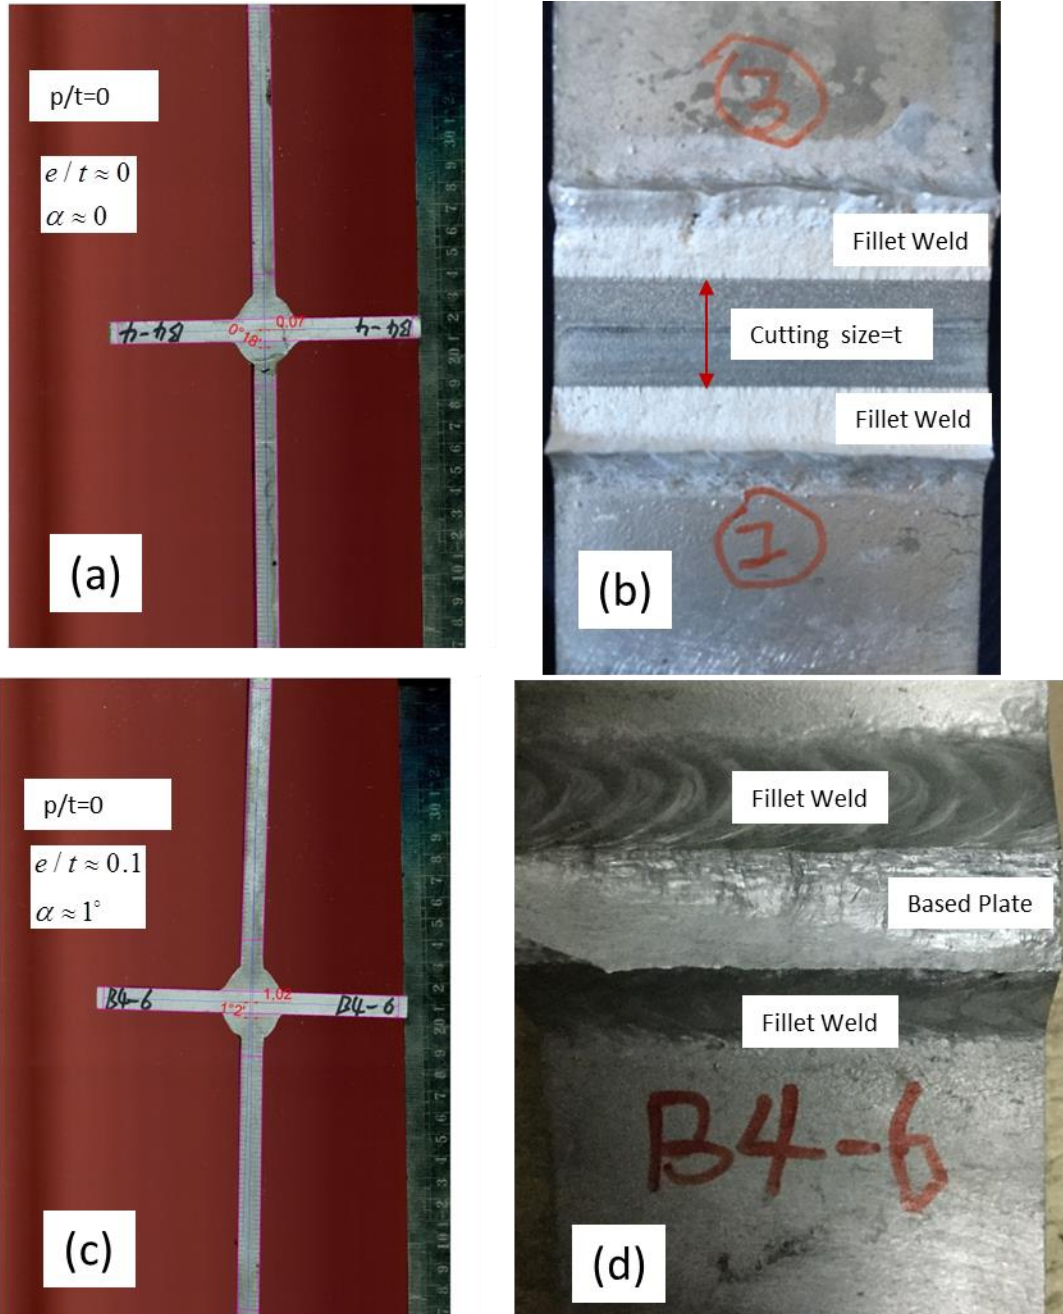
joint misalignment effect: (a) specimen with minimum joint misalignments; (b) the specimen shown in Figure 5.3a failed at weld root; (c) specimen with greater joint misalignments; (d) the specimen shown in Figure 5.3c failed at weld toe
